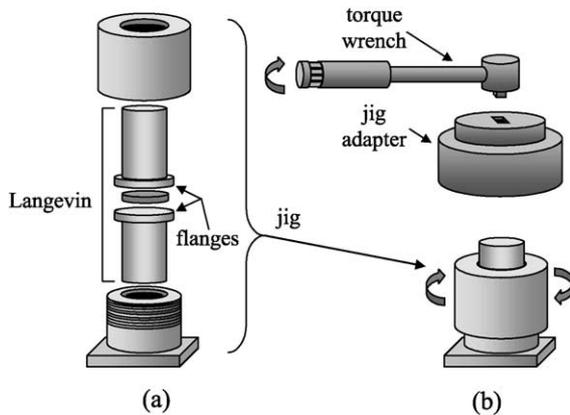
(a) Exploded view of the transducer and of the jig; (b) the assembled structure, the accessory torque wrench and its jig adapter.
